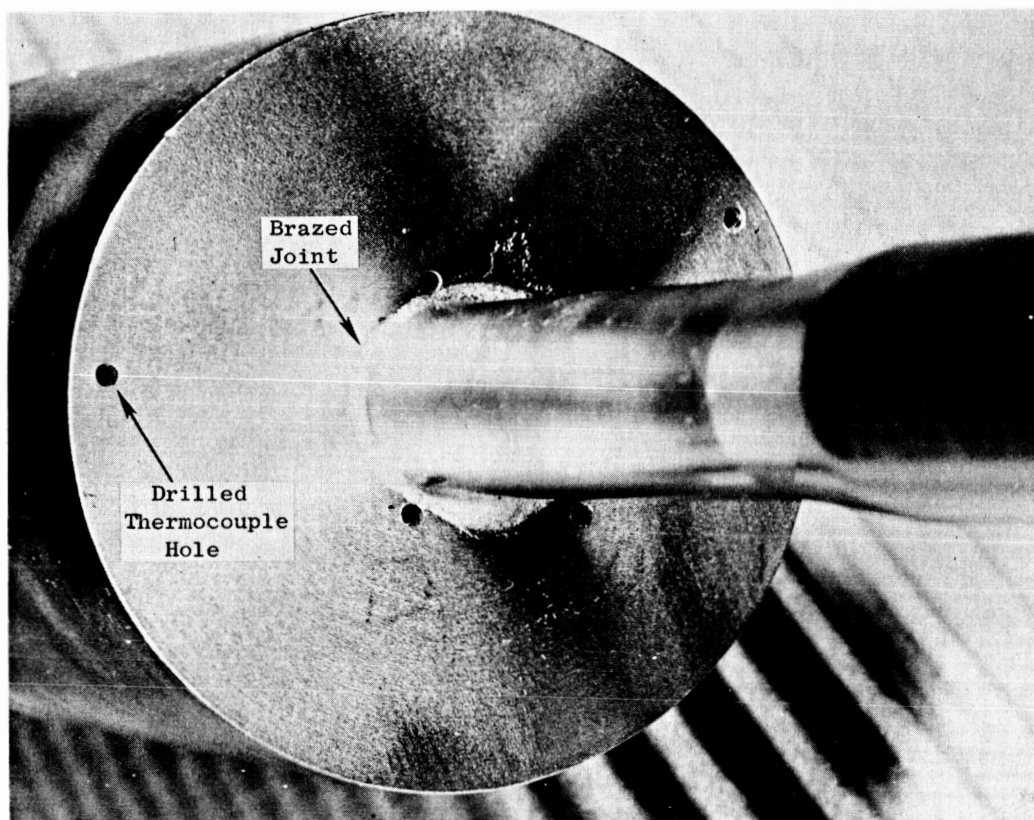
End View of 3/8-Inch ID Condensing Tube (Showing Adapter Pipe for Potassium).
